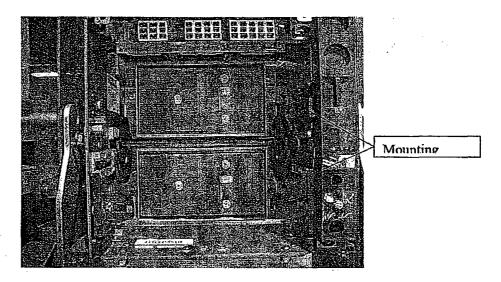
Location of Primary Disconnect Back Panel Mounting Bolts (qty=4)
